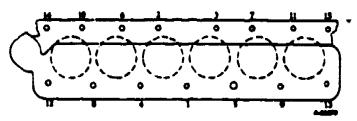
Cylinder Head Bolt Tightening Sequence
